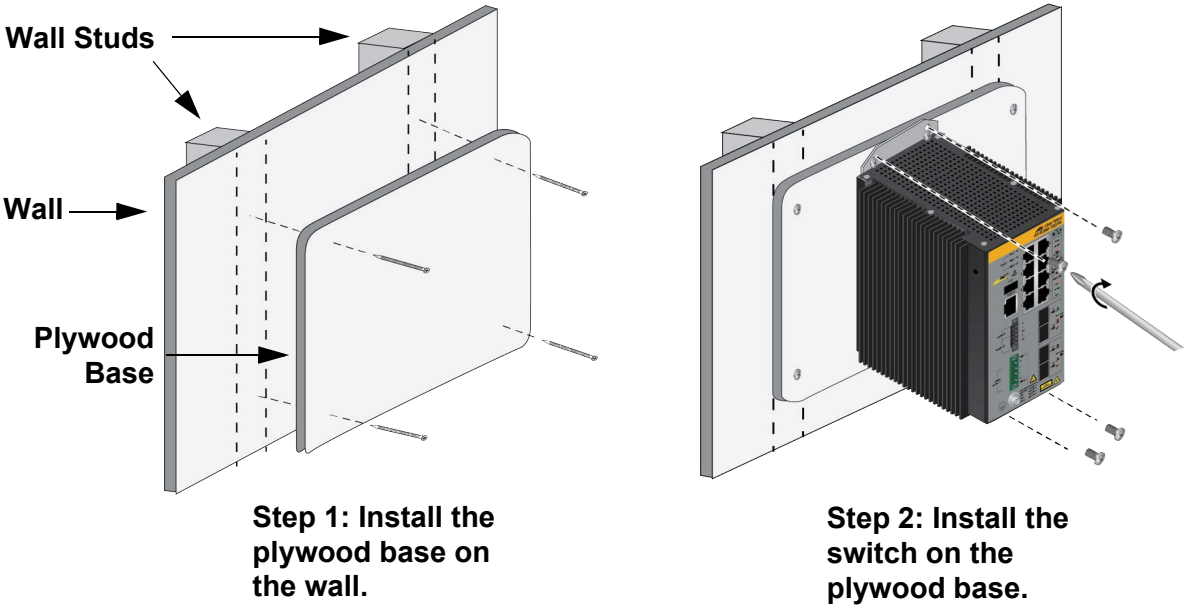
Steps to Installing the Switch on a Wall with a Plywood Base
